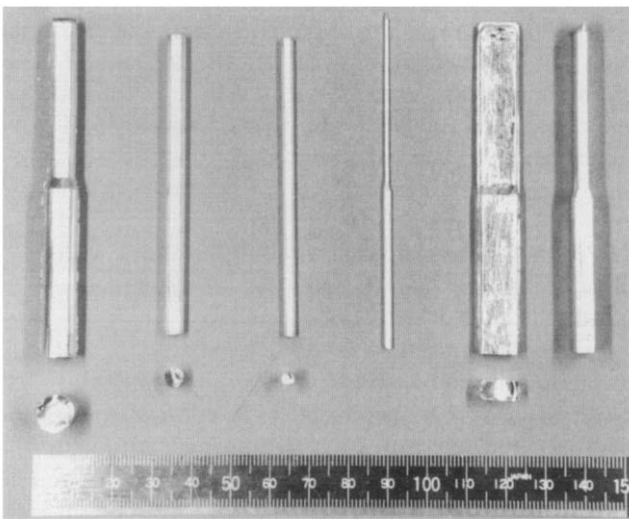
Surface appearance of $Mg_{65}Y_{10}Cu_{25}$ samples in cylindrical and sheet forms produced by high pressure die casting.
